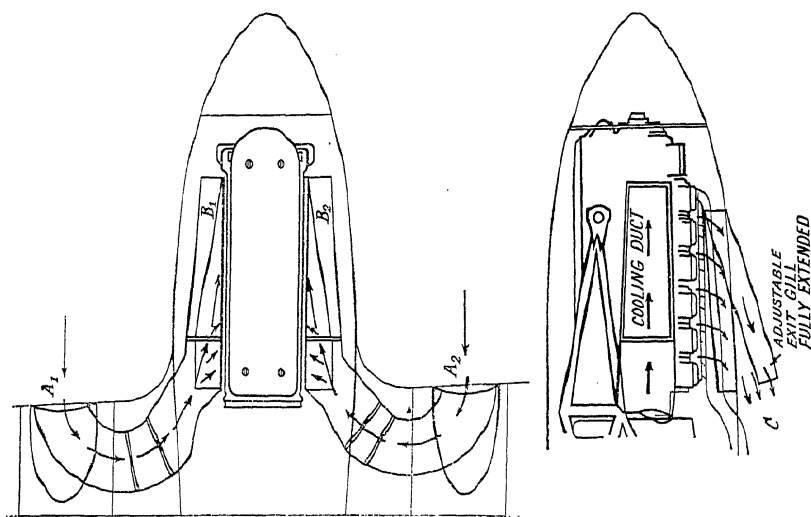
The air-cooling system used on the Gipsy Twelve engine.
